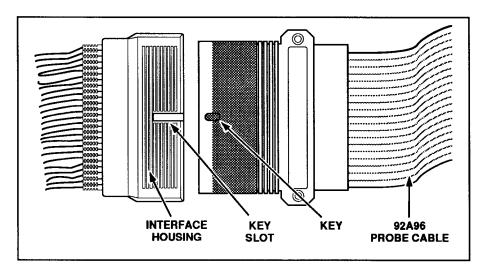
Connecting the interface housing to the 92A96 probe cable. The interface housing label is on the other side of the housing and not visible in the figure.
